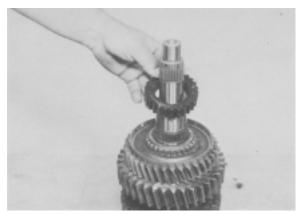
Install 2nd & 3rd speed shift hub sleeve. NOTE: Counter bore in sleeve must go up or sleeve retaining ring will not fit in ring groove.
